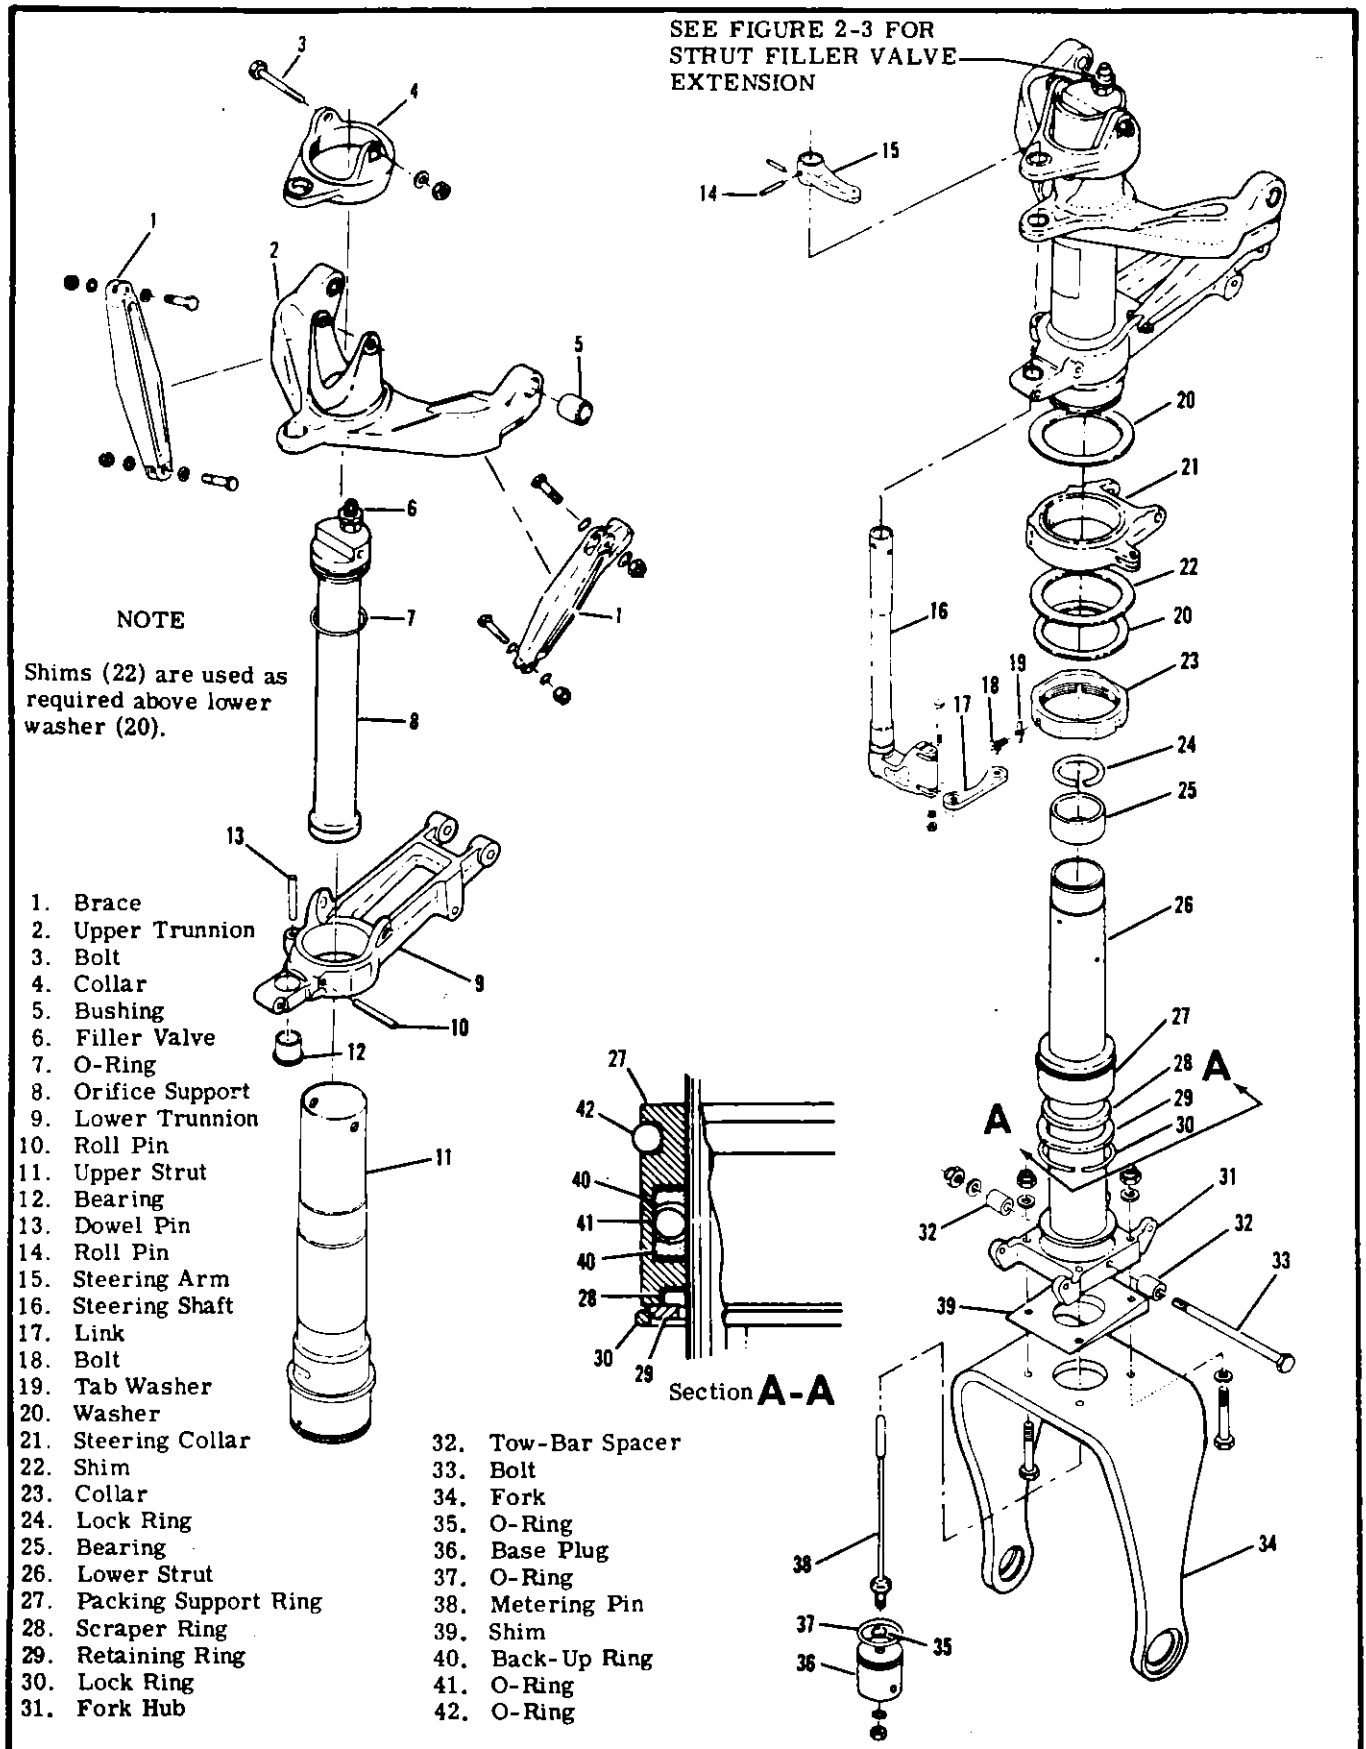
Heavy-Duty Nose Gear Shock Strut
